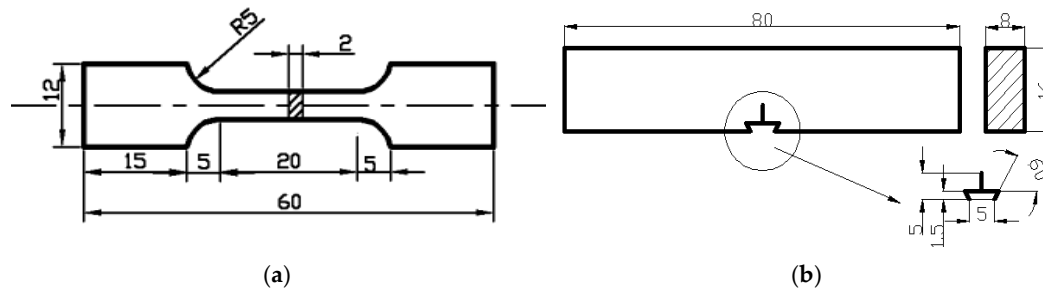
Specimens for (a) tensile; (b) fracture toughness and fatigue crack growth tests.
